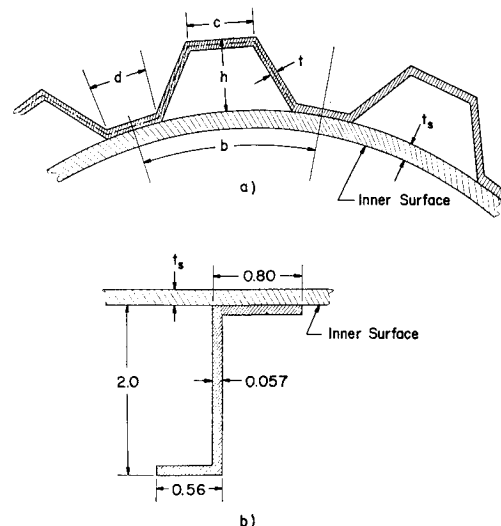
a) Semisandwich corrugated wall geometry, and b) Internal discrete ring geometry.
